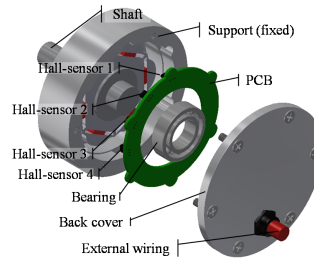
Disassemble view of the Shaft-type magnetic resolver
